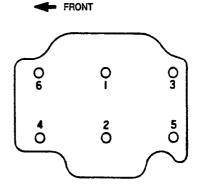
HEAD BOLT TIGHTENING SEQUENCE
